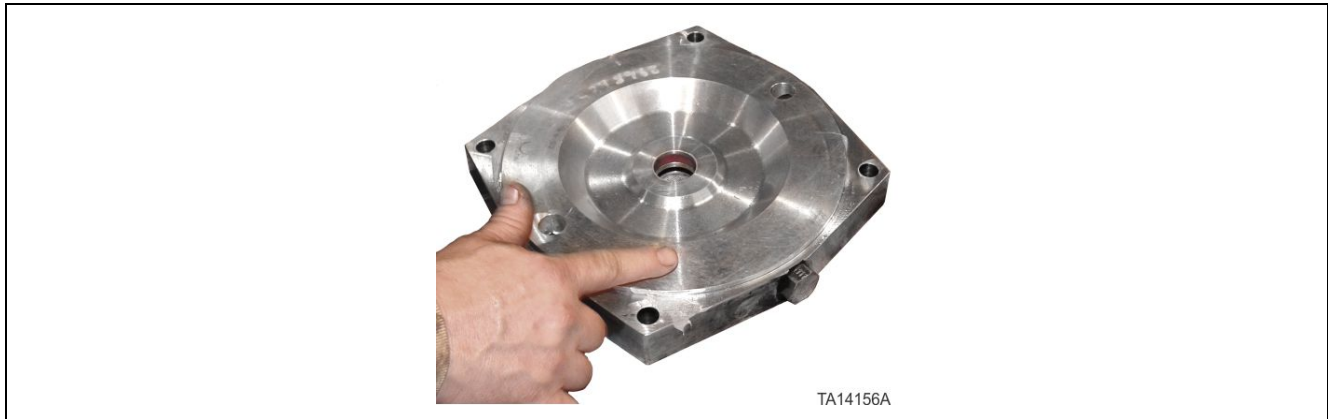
Lubrication of top end cap for inner housing for installation of O-ring
